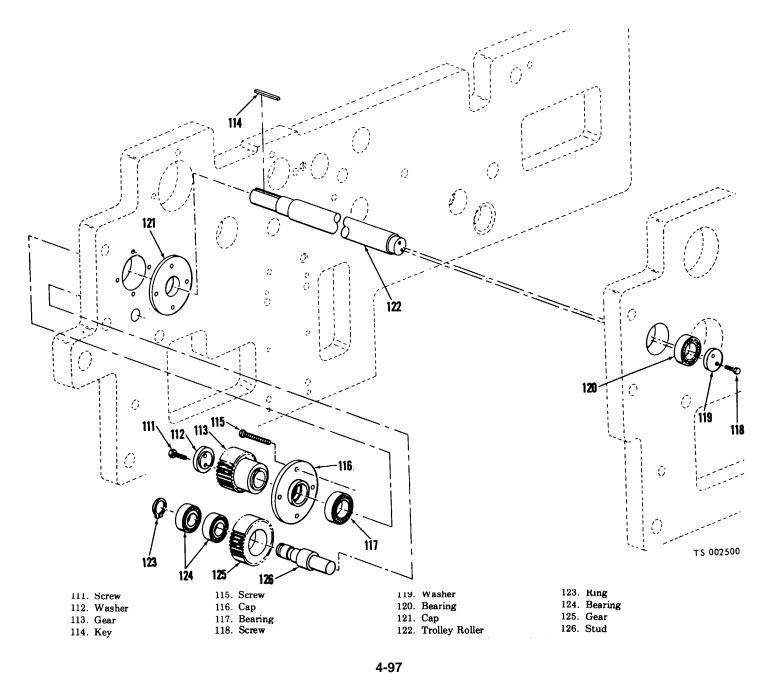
Trolley, paper guide and nipping roller alignment assembly (Sheet 4 of 7).
